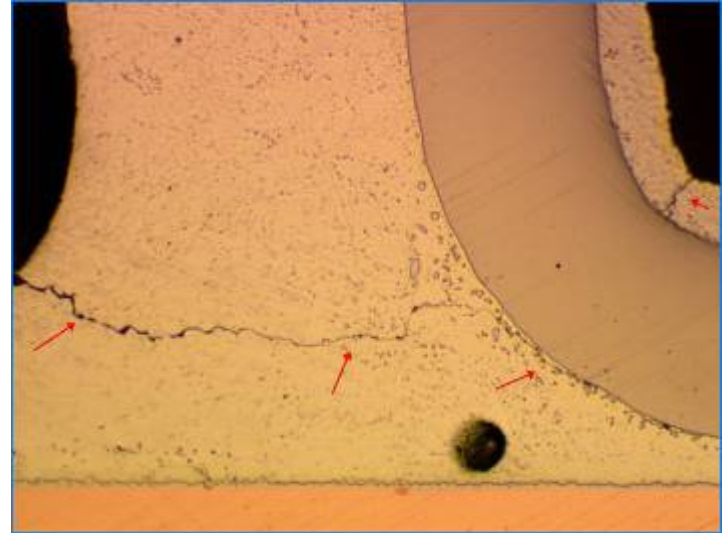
cross section, SN79, U12, right lead solder partial crack, 200xa
